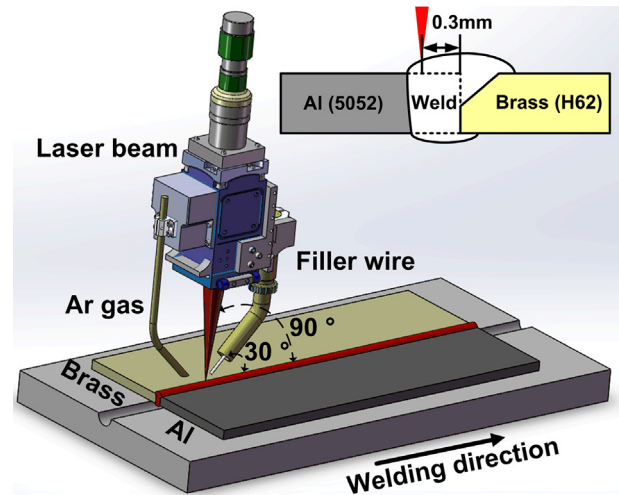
Schematic of laser welding-brazing of Al to brass.
